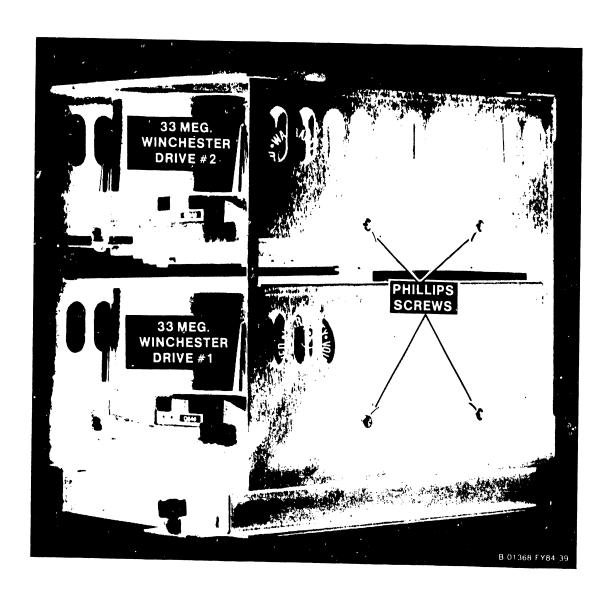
33 Megabyte Winchester Disk Drives (Right Side View)
